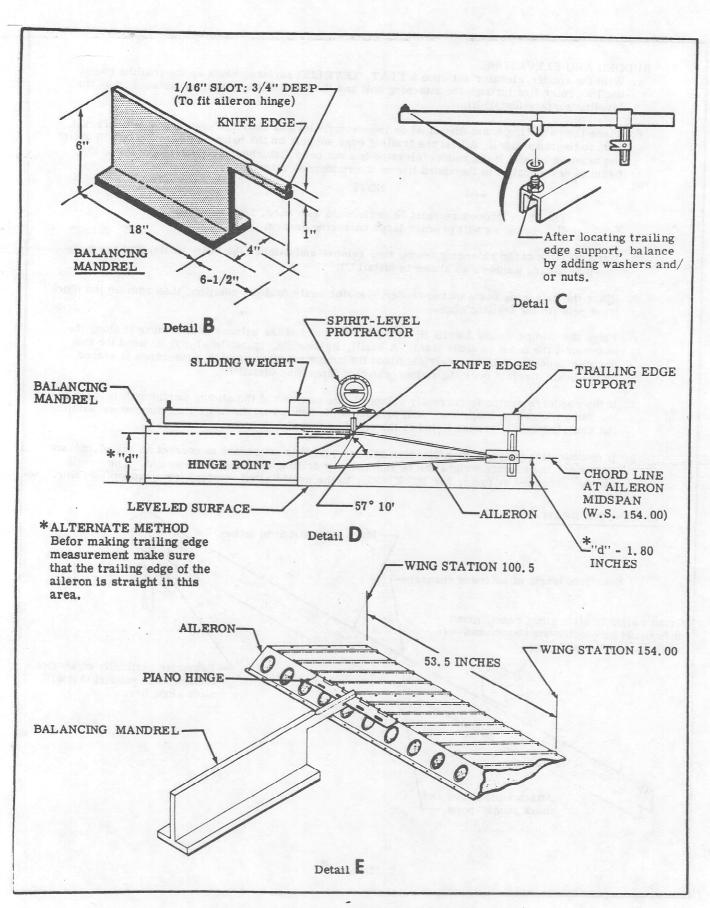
Control Surface Balancing (Sheet 3 of 5)
